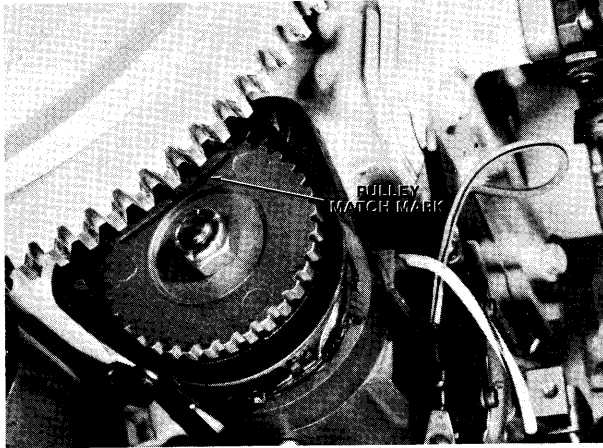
Aligning Distributor Pulley Match Mark With Flywheel
